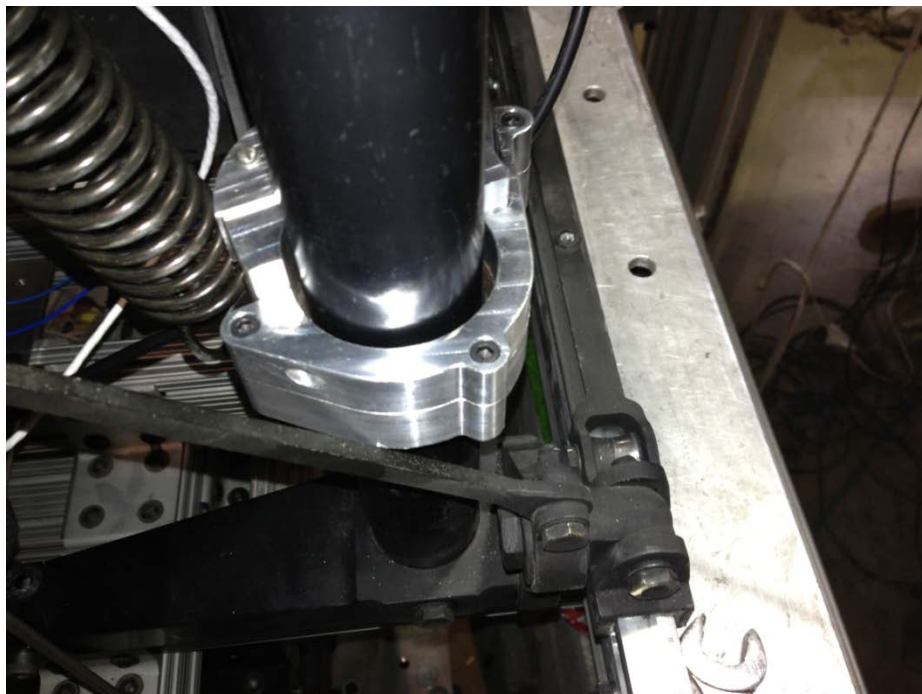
Lower Bracket - Right Side (From the back) - X-bar Clearance Issue
